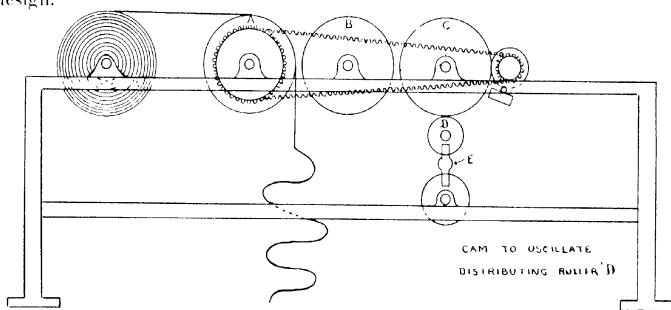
Diagram of Machine for Printing Elastic Fabrics
